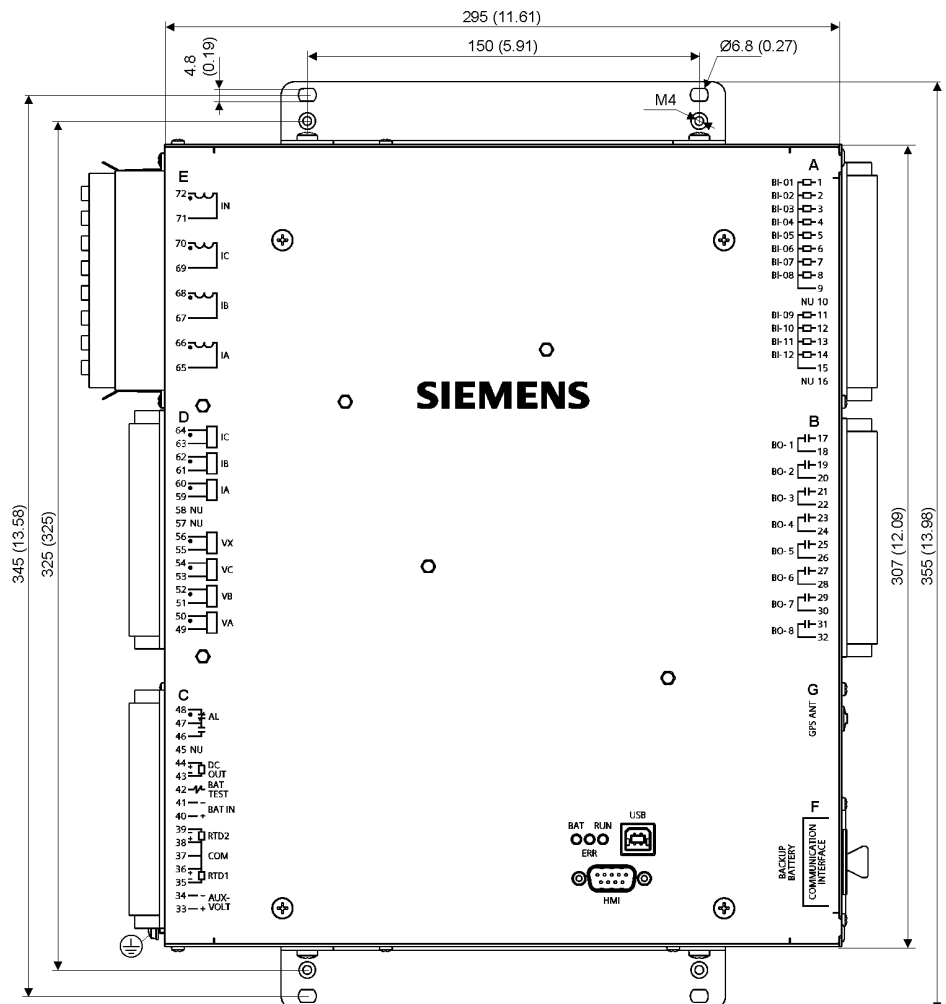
Dimensional drawing Feeder Automation Controller 7SC80
